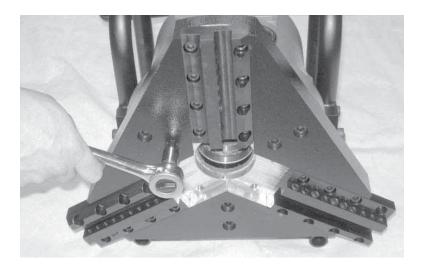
Remove the 6 screws holding the rotating head to the main shaft.
